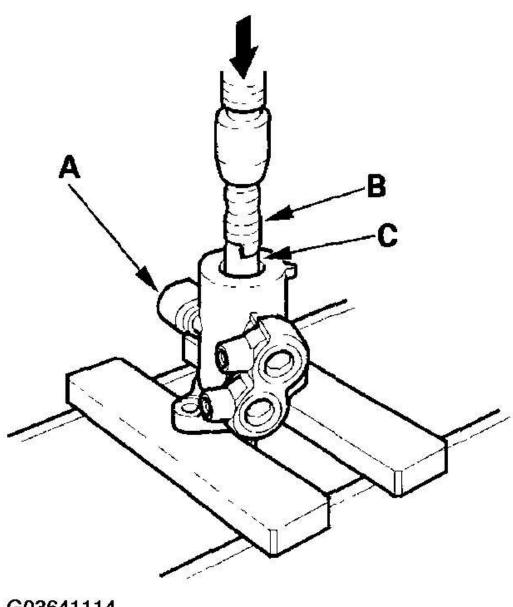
Removing Cylinder End Seal Courtesy of AMERICAN HONDA MOTOR CO., INC.
